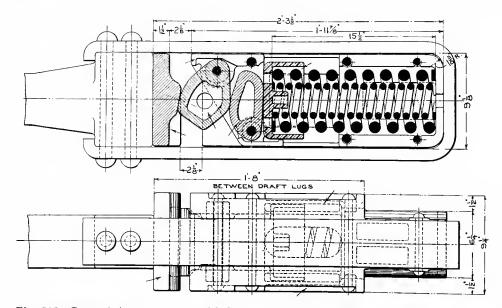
General Arrangement of McCord Draft Gear, Type D. McCord & Company.
